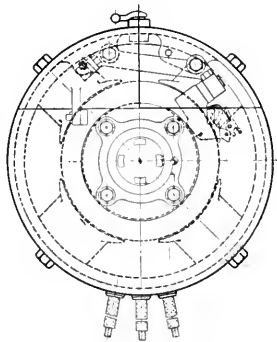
A Cross Sectional View of a Standard Automotive Motor of the Two-brush Stud Type
